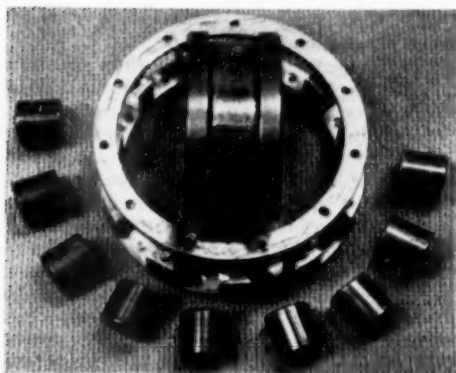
PITTED ROLLERS AND SPALLED INNER RACE OF HUP PLANET BEARING
